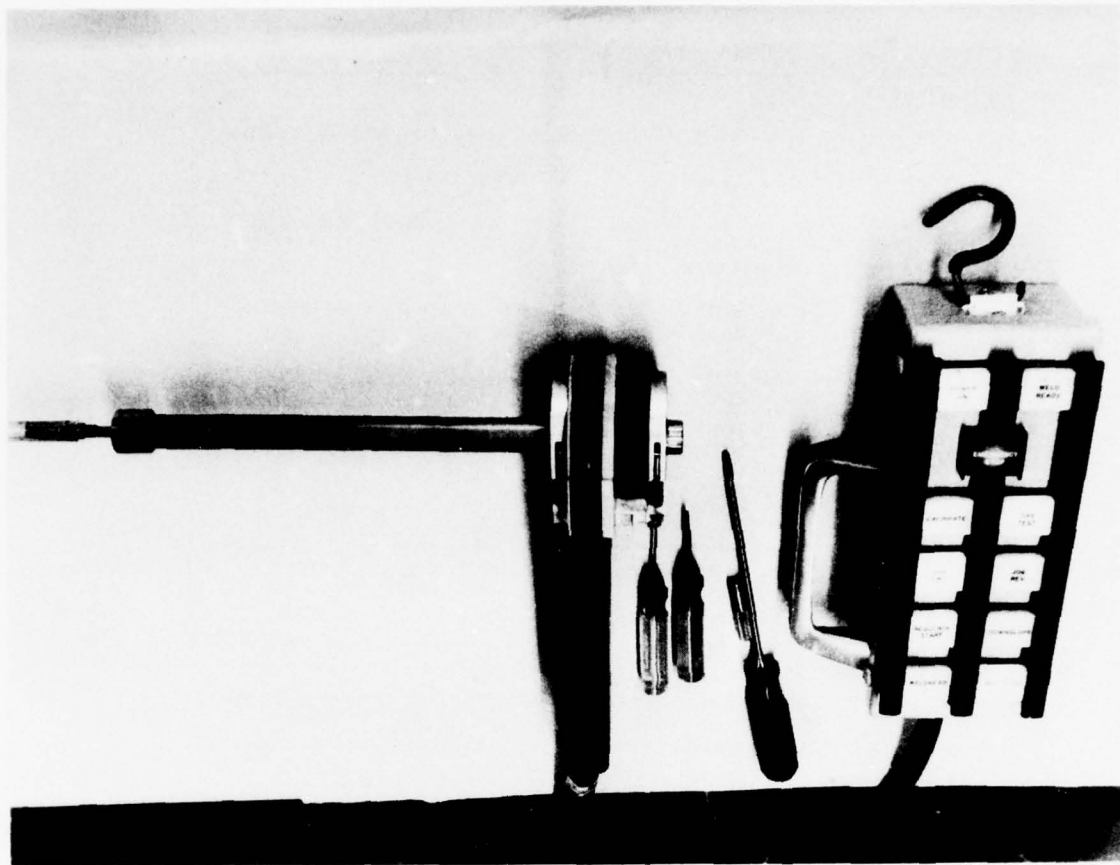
Astro-Arc Weld Head With Offset Clamp for Nut and Mandrel Assembly and Accessories
